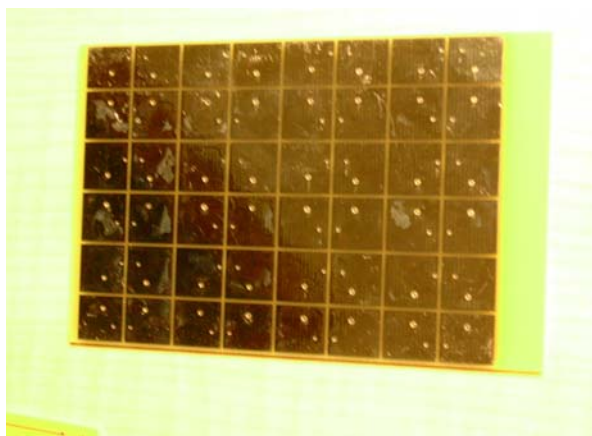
The pad side of a board. These pads are 1.1 cm sq. The plated through holes for feeding signals to the upper layers are visible.
